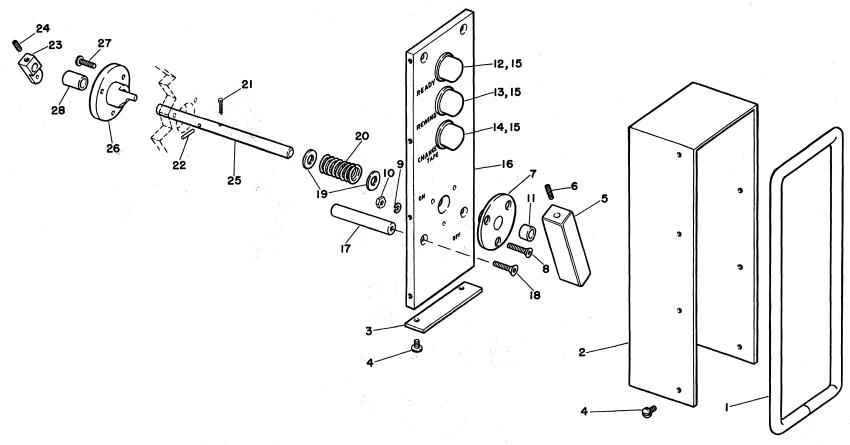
A 500 084 00 CONTROL PANEL ASSEMBLY-EXPLODED VIEW
